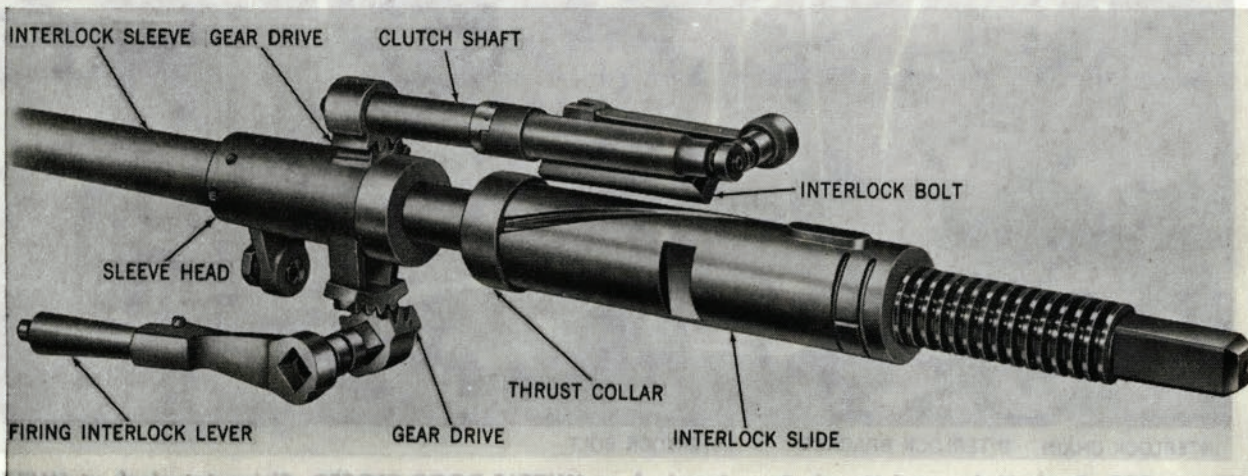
Interlock Slide—Muzzle Door Closed and Unlocked.
